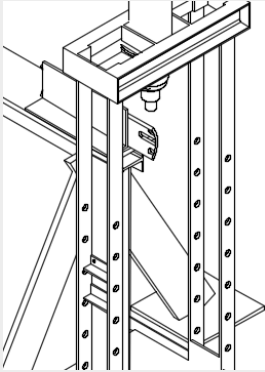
Isometric View IS20 Part, anchor, and force Block
